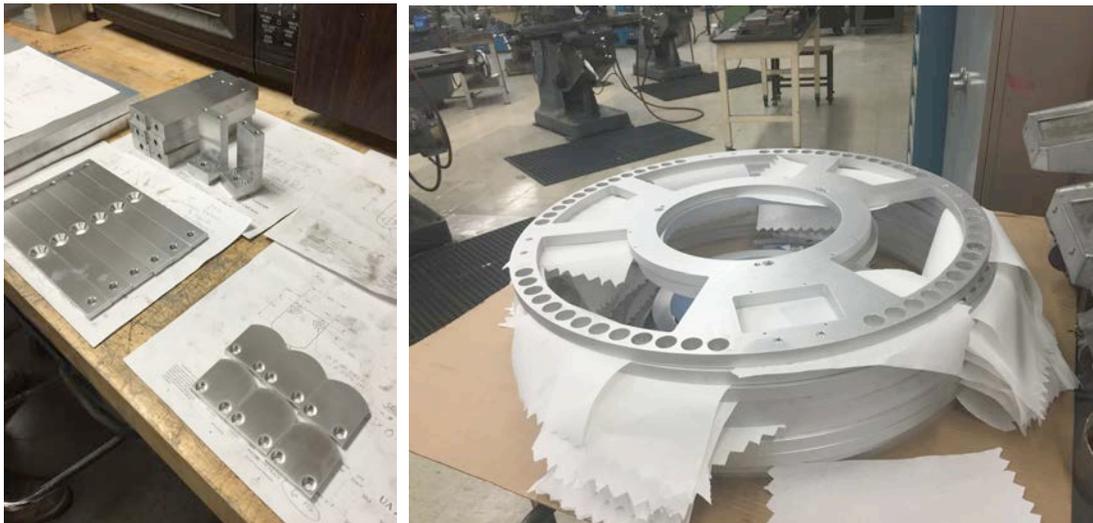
(Left) Mirror Cell was machined at the Aerospace and Mechanical Engineering Machine Shop. (Right) Telescope Rings that were machined at the Machining and Welding Center.
